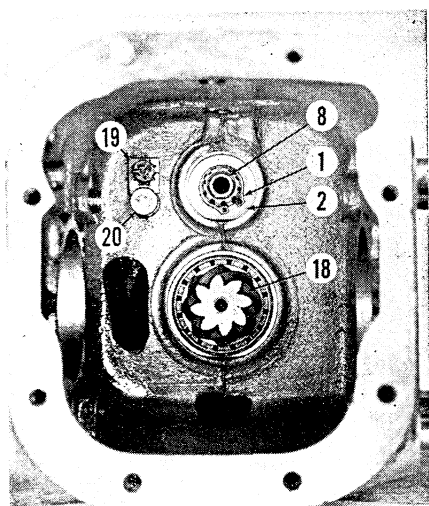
Rear view Pony transmission with differential removed. Note etched markings on rear face of bevel pinion shaft. Identical markings will be found on bevel ring gear as these are supplied in matched sets.
